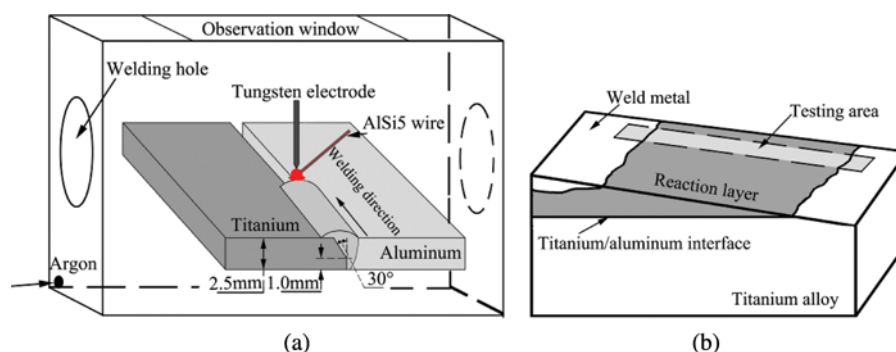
Schematic drawing of experiments: (a) gas tungsten arc welding and (b) samples for X-ray diffraction.
